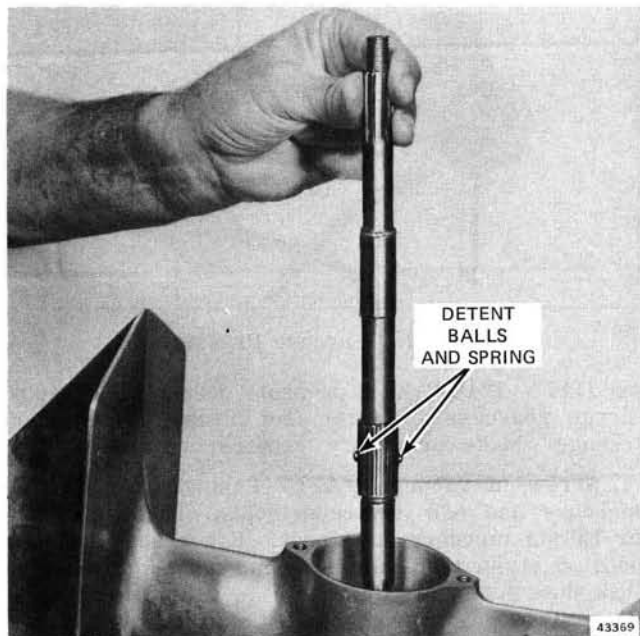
Installing Propeller Shaft, Spring and Detent Balls
